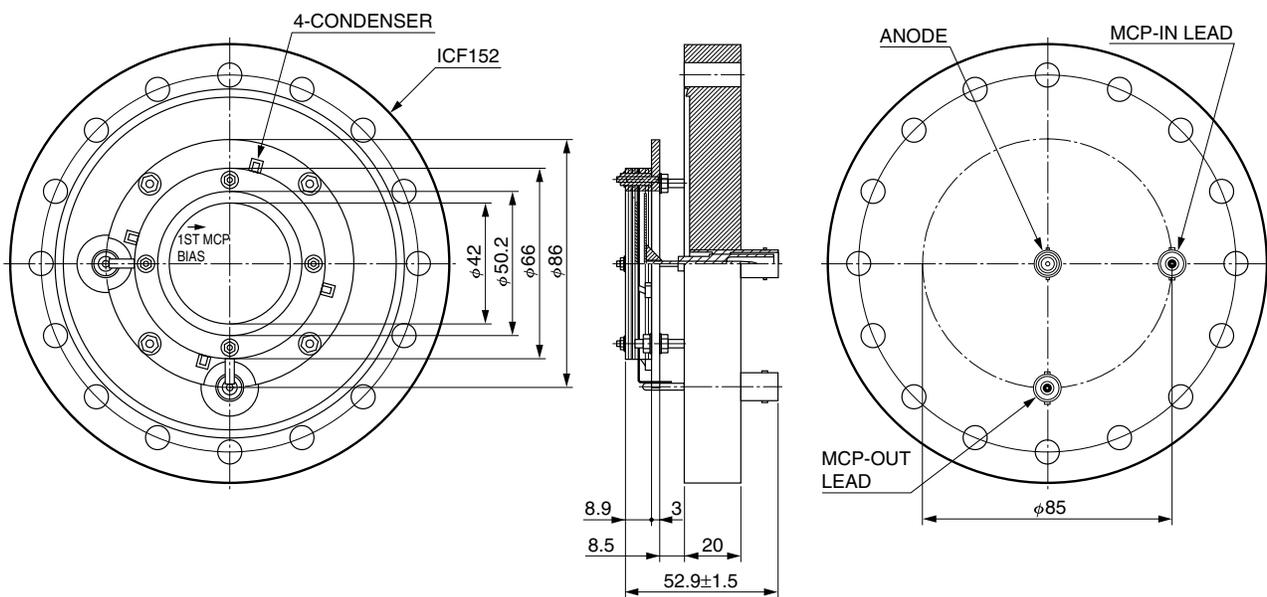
High-speed Response MCP/Vacuum Flange Assembly
